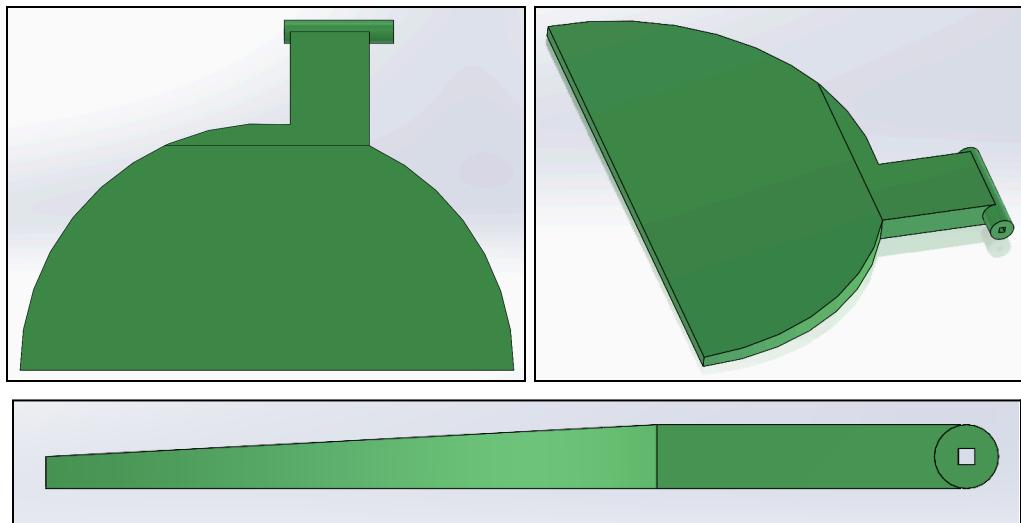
, A.9: Bin Cabinet and Door Assembly.
